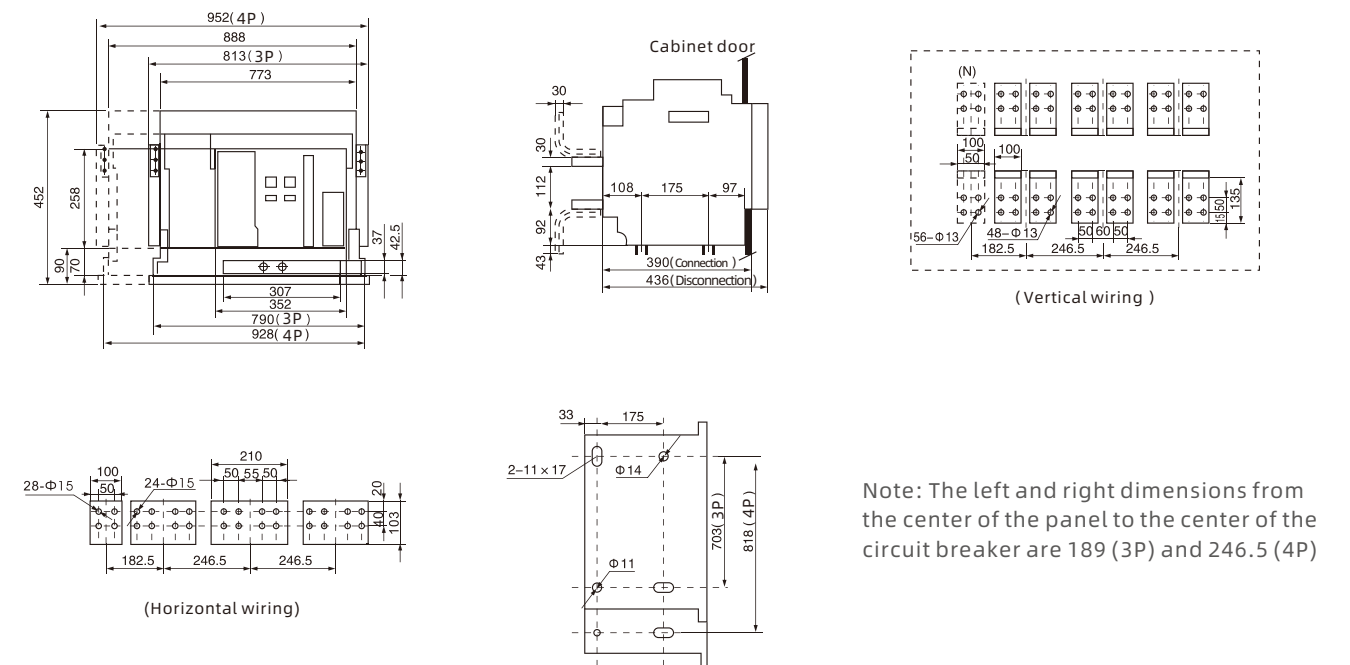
Draw-out circuit breaker overall and installation dimensions (ARW1-6300, 6300/4In=4000A, 5000A)
